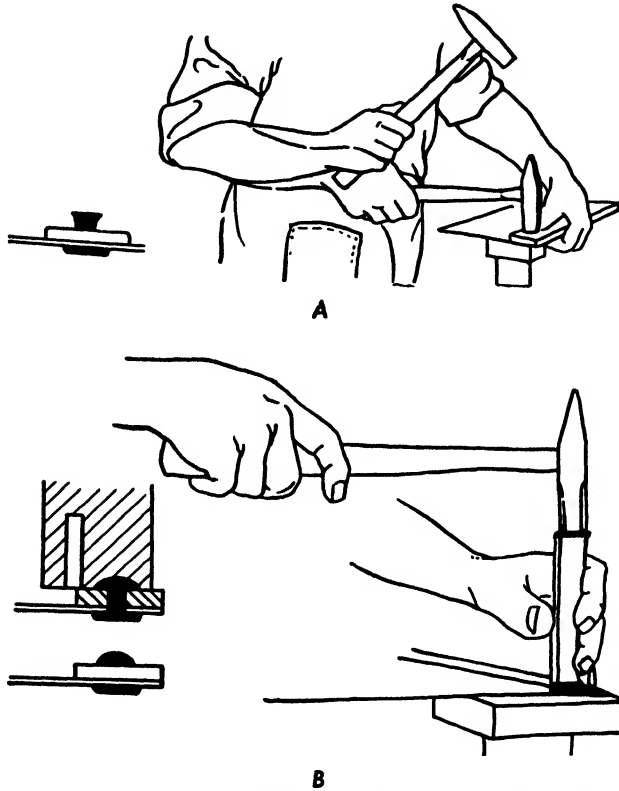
A, in hammering down the end of the rivet, strike a few straight, medium-weight blows. Heavy blows or too many blows will cause the metal to stretch and buckle around the rivet. B, finish the job with the cuplike hollow in the rivet set. (Stanley Tools)
